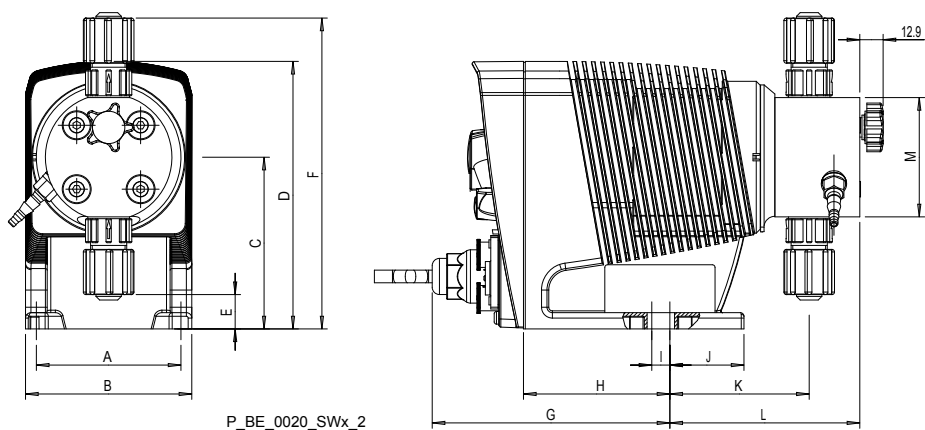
Dimension drawing Beta b BT4b/BT5b, material version PP - dimensions in mm
